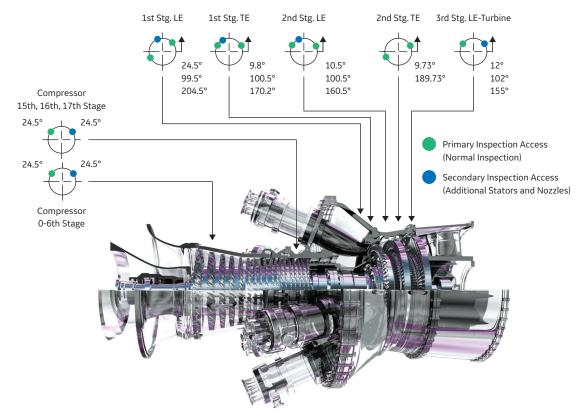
Borescope inspection access locations for 6FA.03
